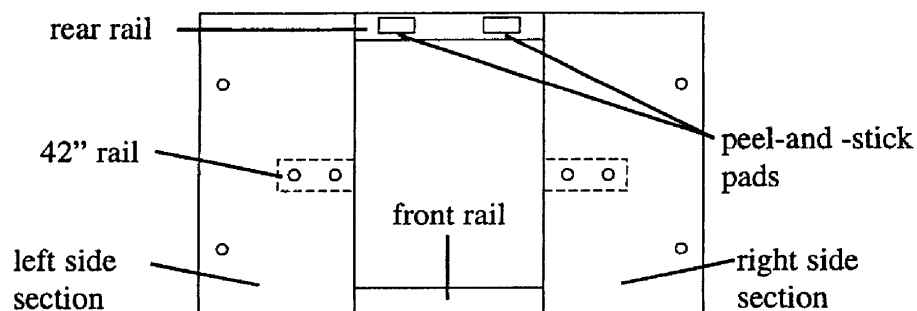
The 42" rail and the peel-and-stick pads must be in place before adding the hinged section.
